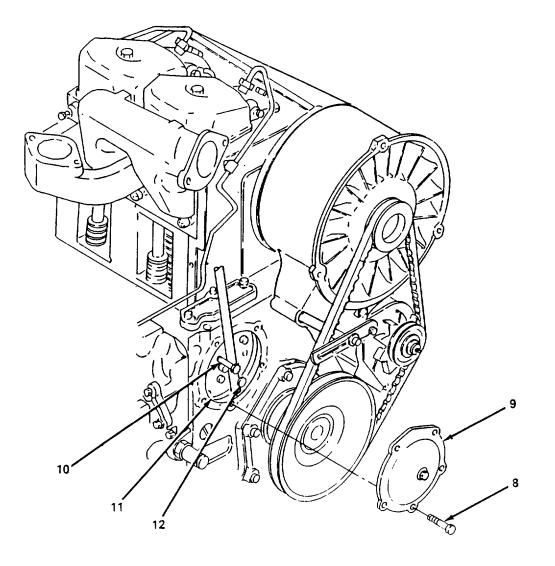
Fuel Injection Pump, Adjust (Sheet 2 of 2).
